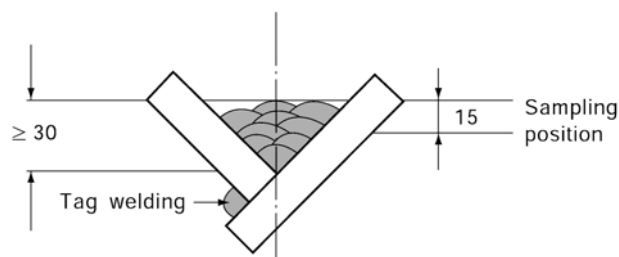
Deposited Weld Metal Test Assembly
